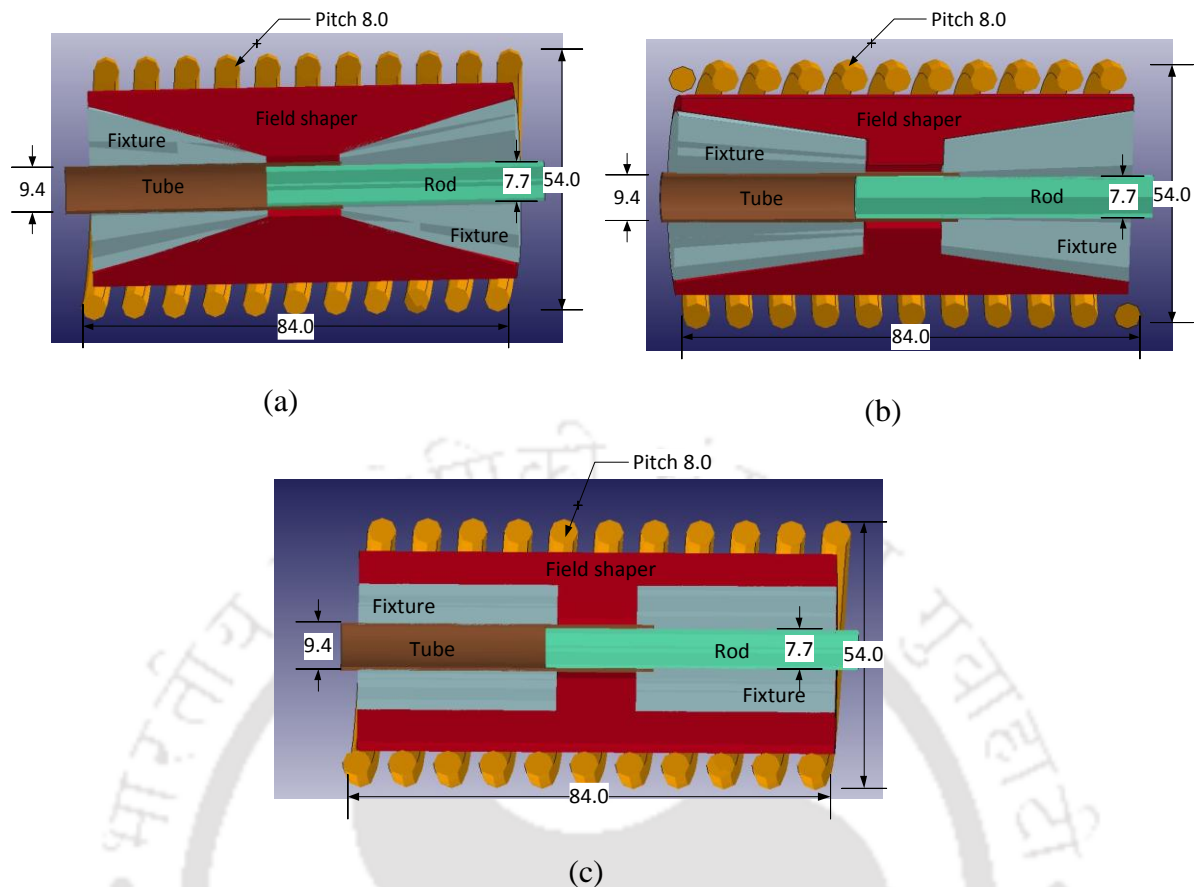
Dimensions of the complete assembly with the (a) tapered, (b) taper-stepped, and (c) stepped field shaper
